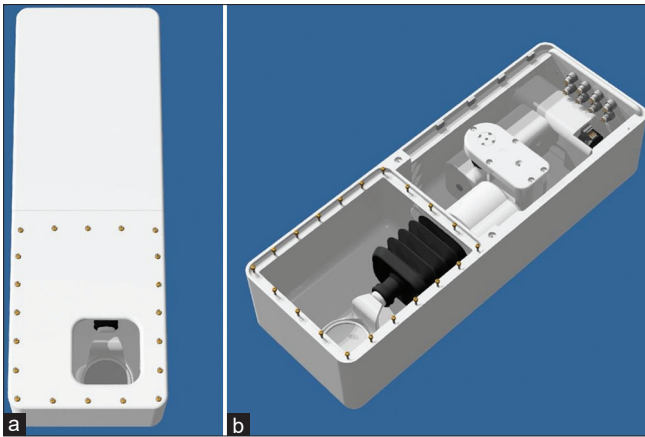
(a) External CAD drawing of the robotic system. (b) Internal CAD drawing of the robotic system
